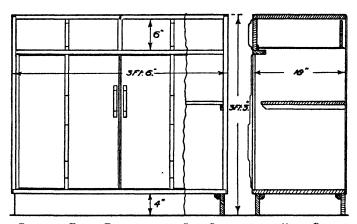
Front Elevation and Side Section with Chief Sizes.
